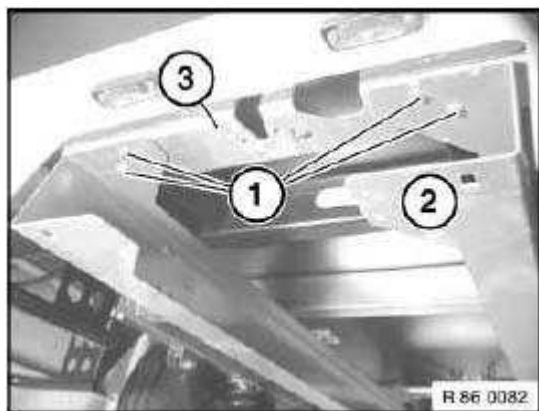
Identifying Loading Ramp Frame On Cross-Strut
